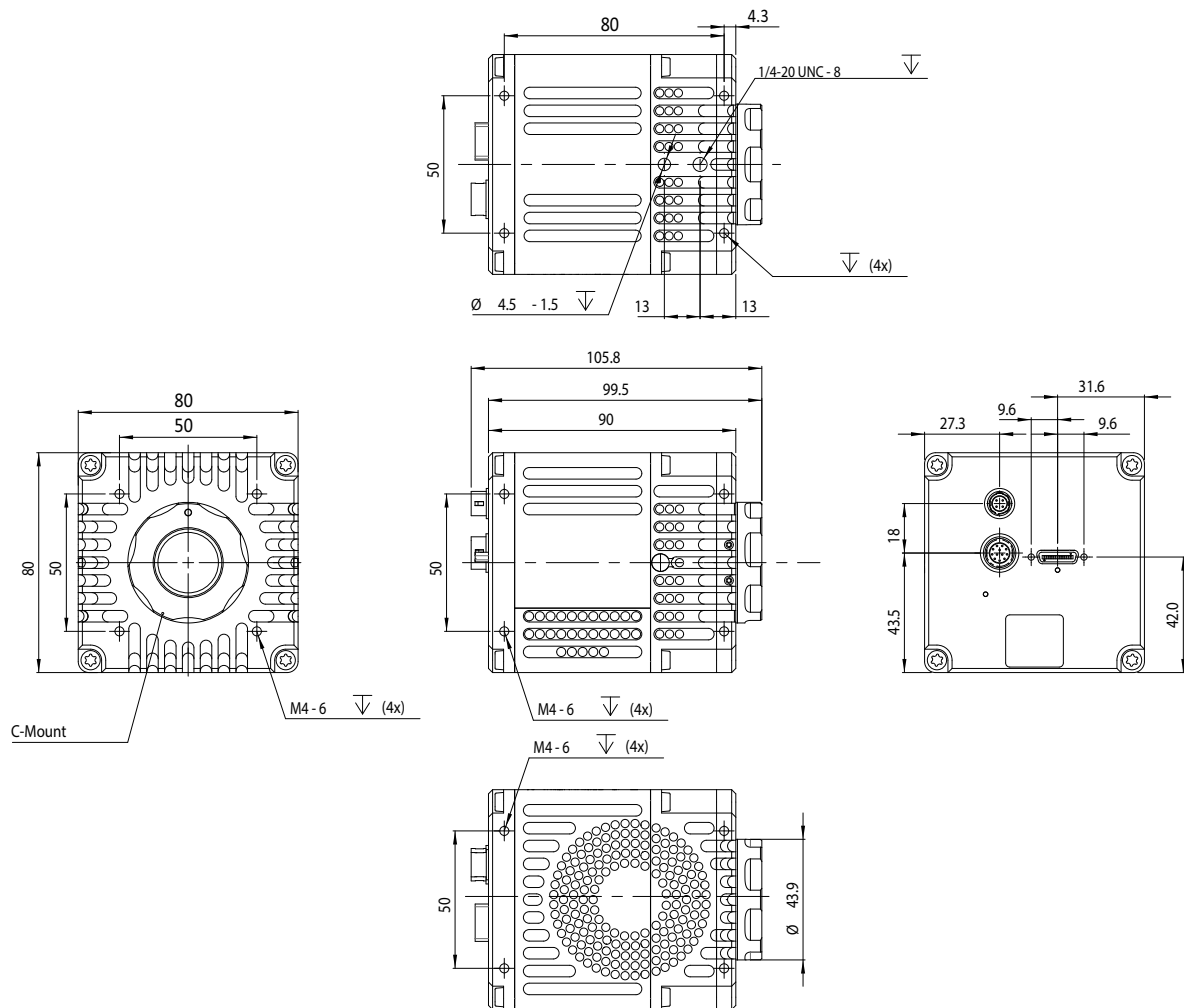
Goldeye CL-008 SWIR Cool TEC1, -032 SWIR Cool TEC2 with C-Mount adapter Type 1
